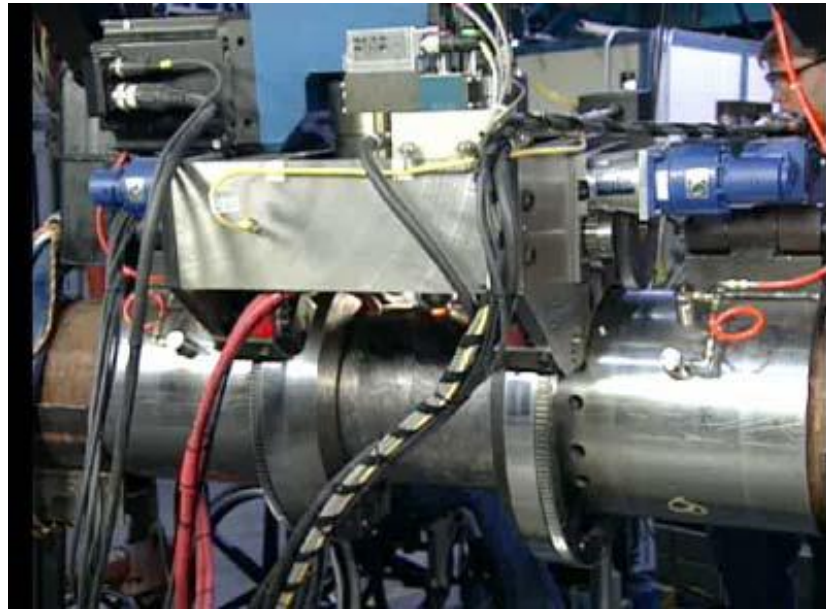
Prototype pipe welding system showing external FSW head (Feng, Steel, Packer & David, 2005).
